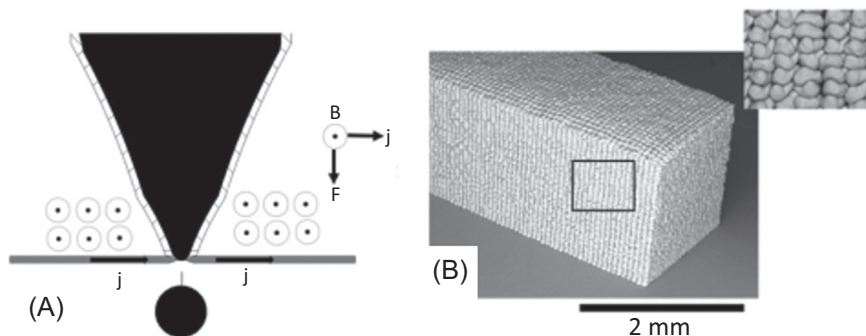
(A) The MetalJet ejection mechanism and (B) printed Ag part.
